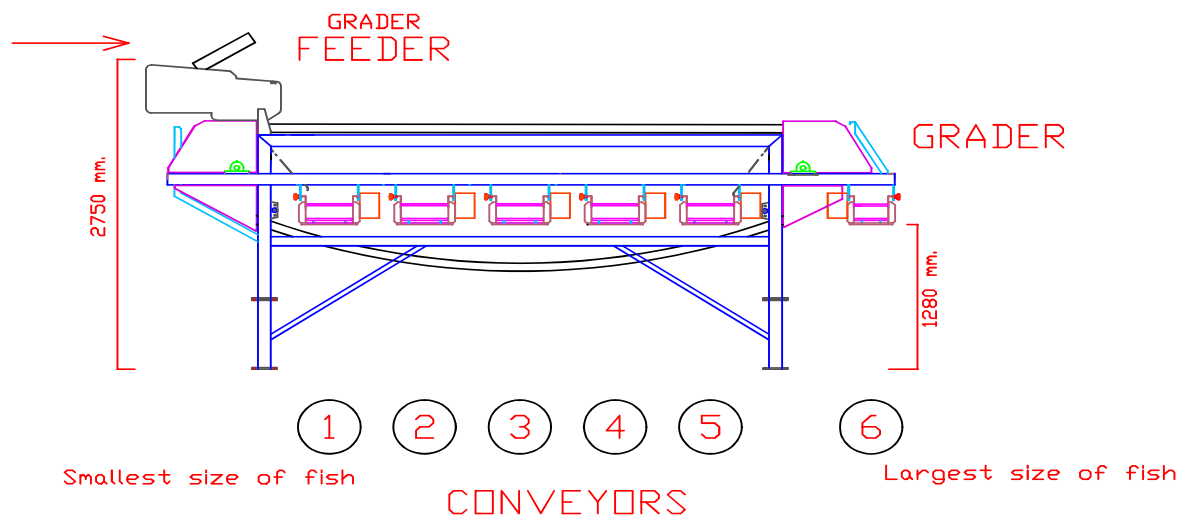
a. Side - view of Style grading machine showing conveyors # 1 to # 6.
